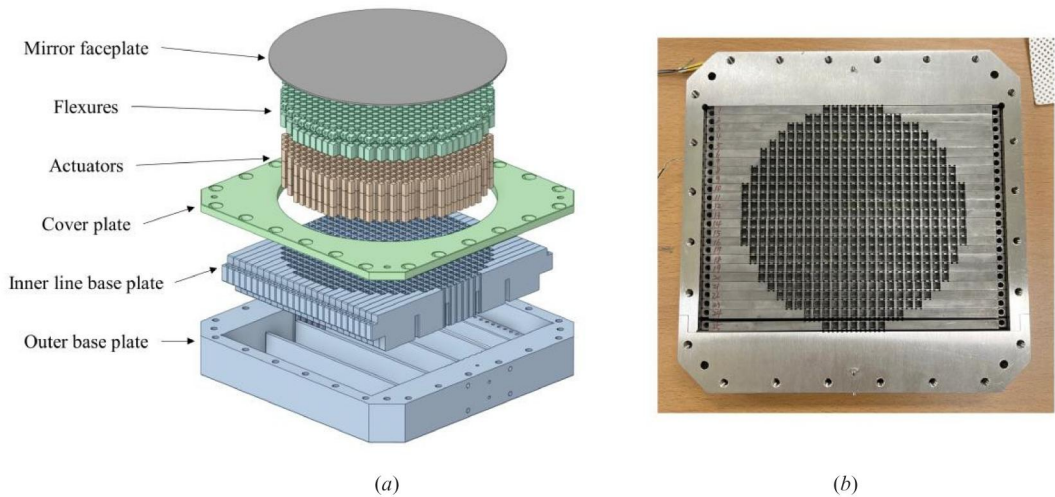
Base plate: (a) exploded view of the line-module-type SiC DM, (b) manufactured outer and inner line base plates.
